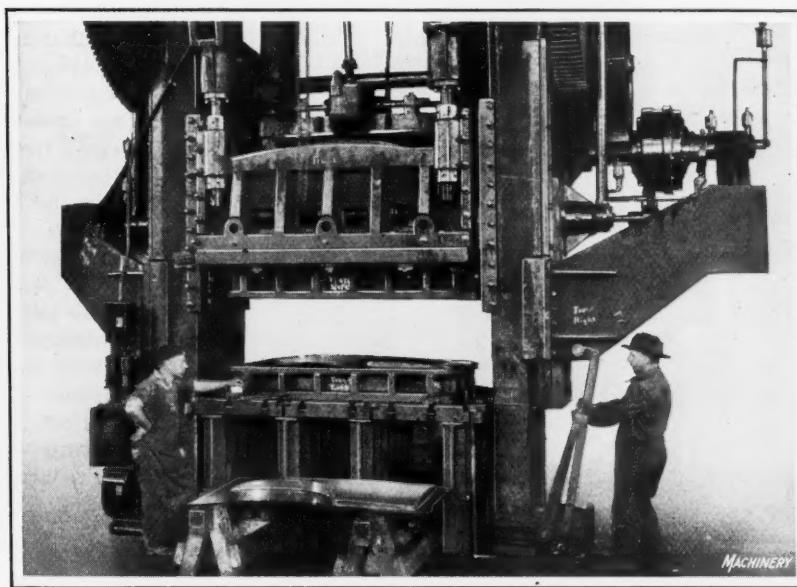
Toggle Drawing Press with a 9-inch Crankshaft, making Wheel Housings
